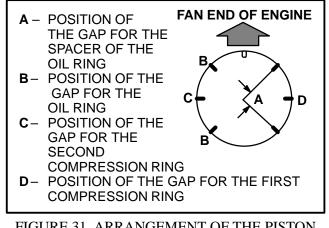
ARRANGEMENT OF THE PISTON RINGS ON THE PISTON
